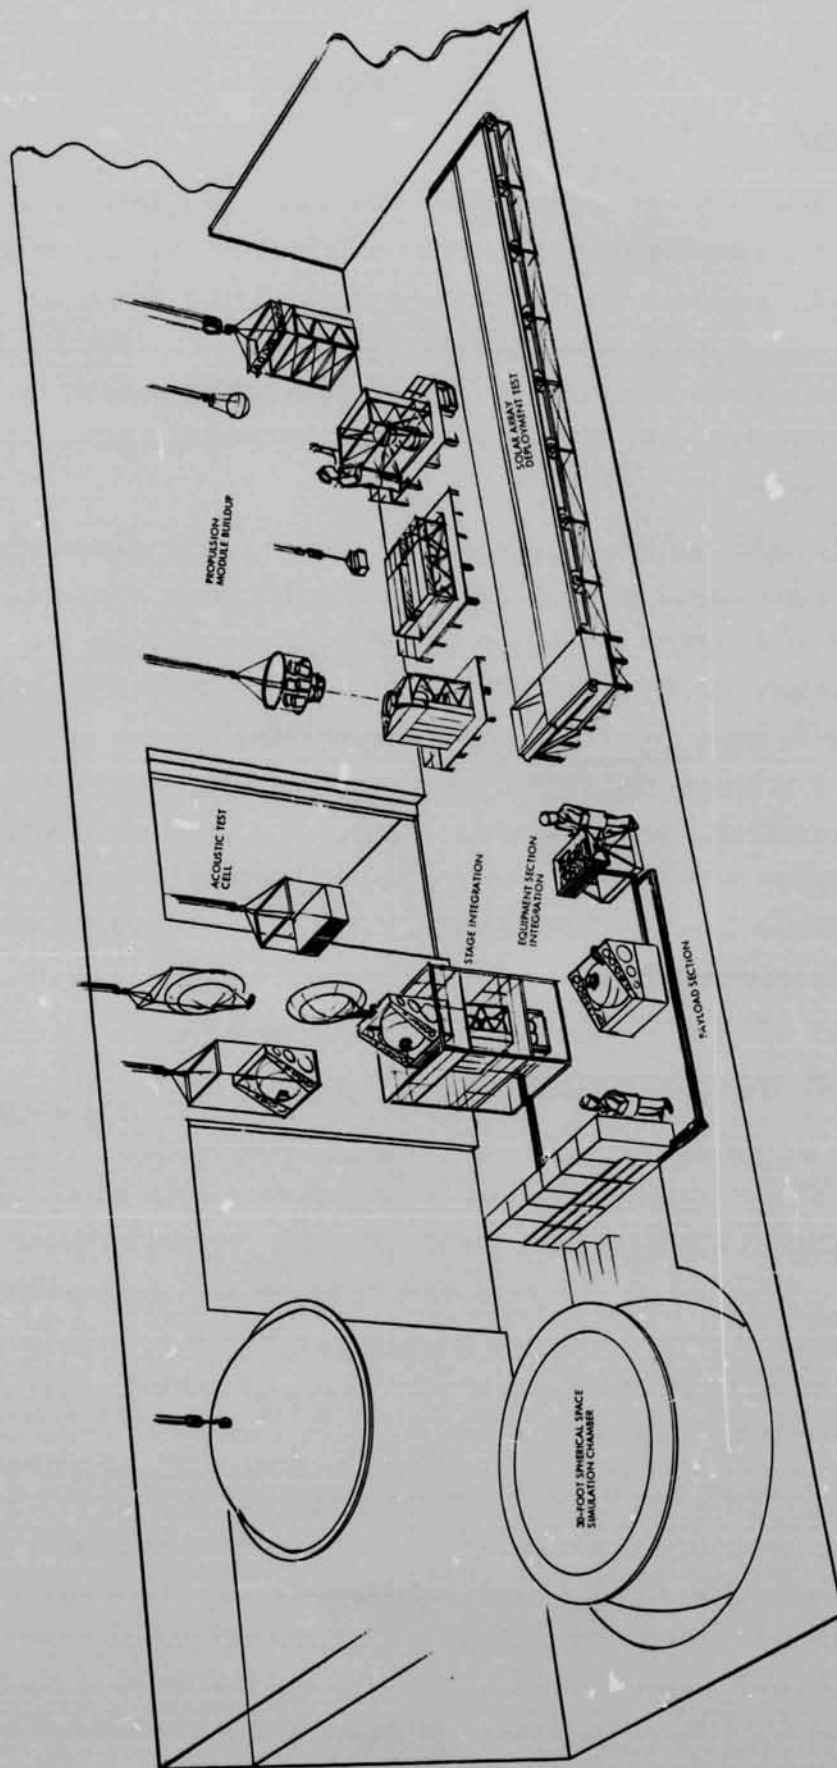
Representative Assembly Integration and Test (TRW Bldg. M-1 High Bay)
